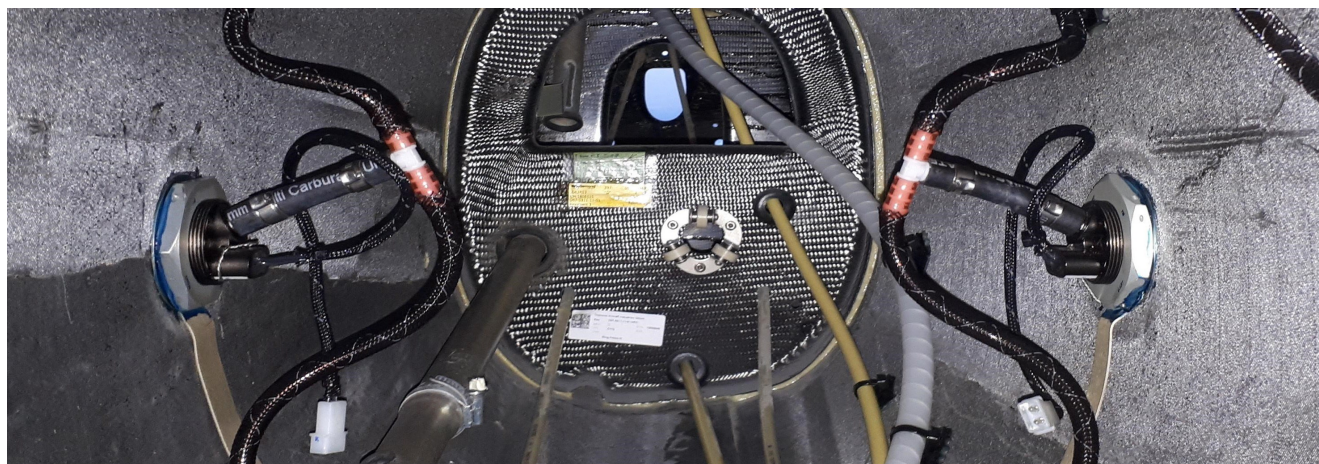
New installation of the static ports with the hose barb fittings pointing upwards.
